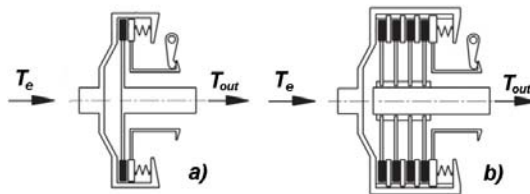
Switchable types of friction clutches a) Single-plate clutch b) Multi-plate clutch
